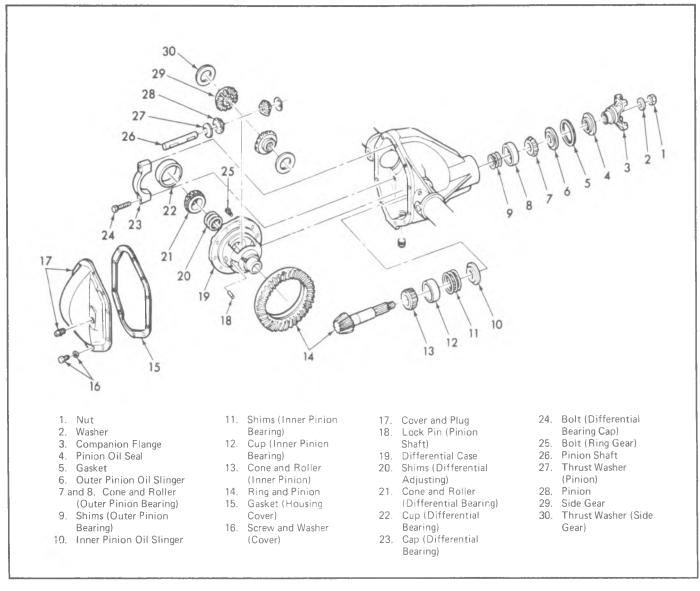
B-7--Dana 9-3/4" Ring Gear Axle Exploded View
